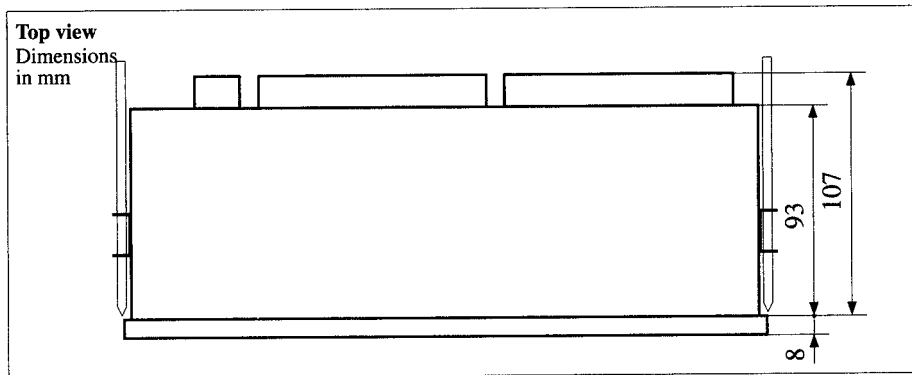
DAA 288-120/240 mounting dimensions, top view
